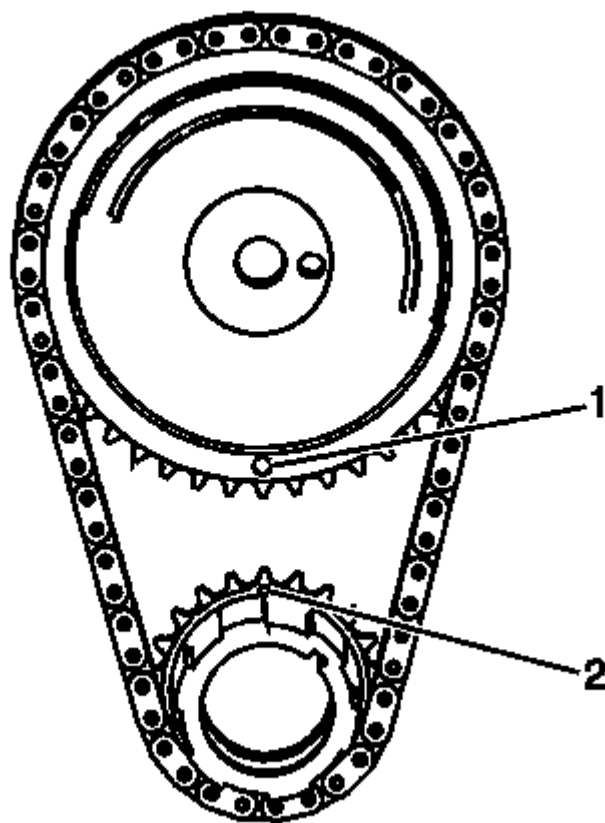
Identifying Camshaft & Crankshaft Sprocket Marks
